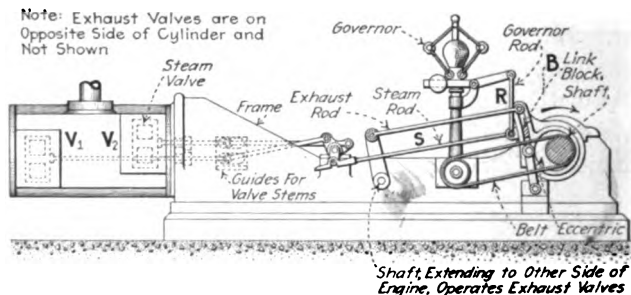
An engine equipped with a variable-cut-off valve-mechanism. (Porter-Allen engine.)
